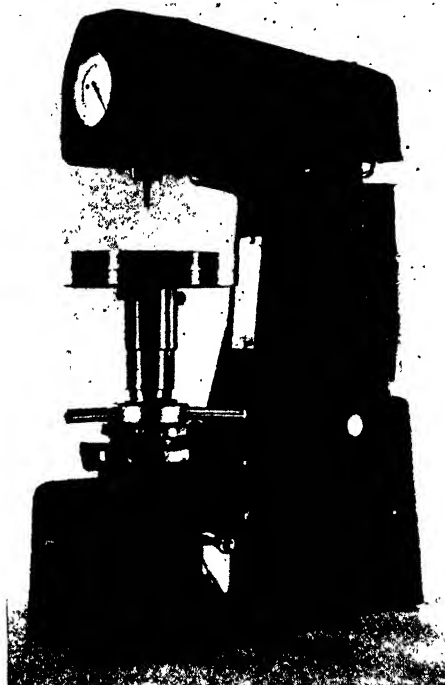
Rockwell hardness-testing machine (Wilson Mechanical Instrument Co.).
